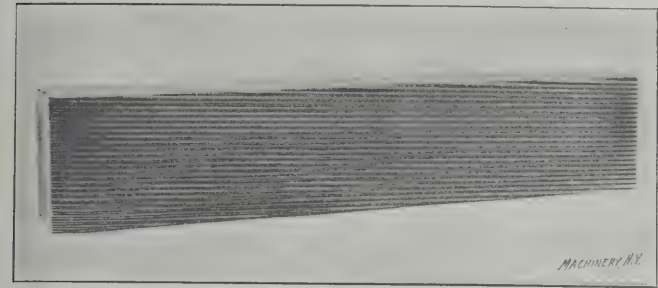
A Thread Rolling Die for Rolling United States Standard Threads
